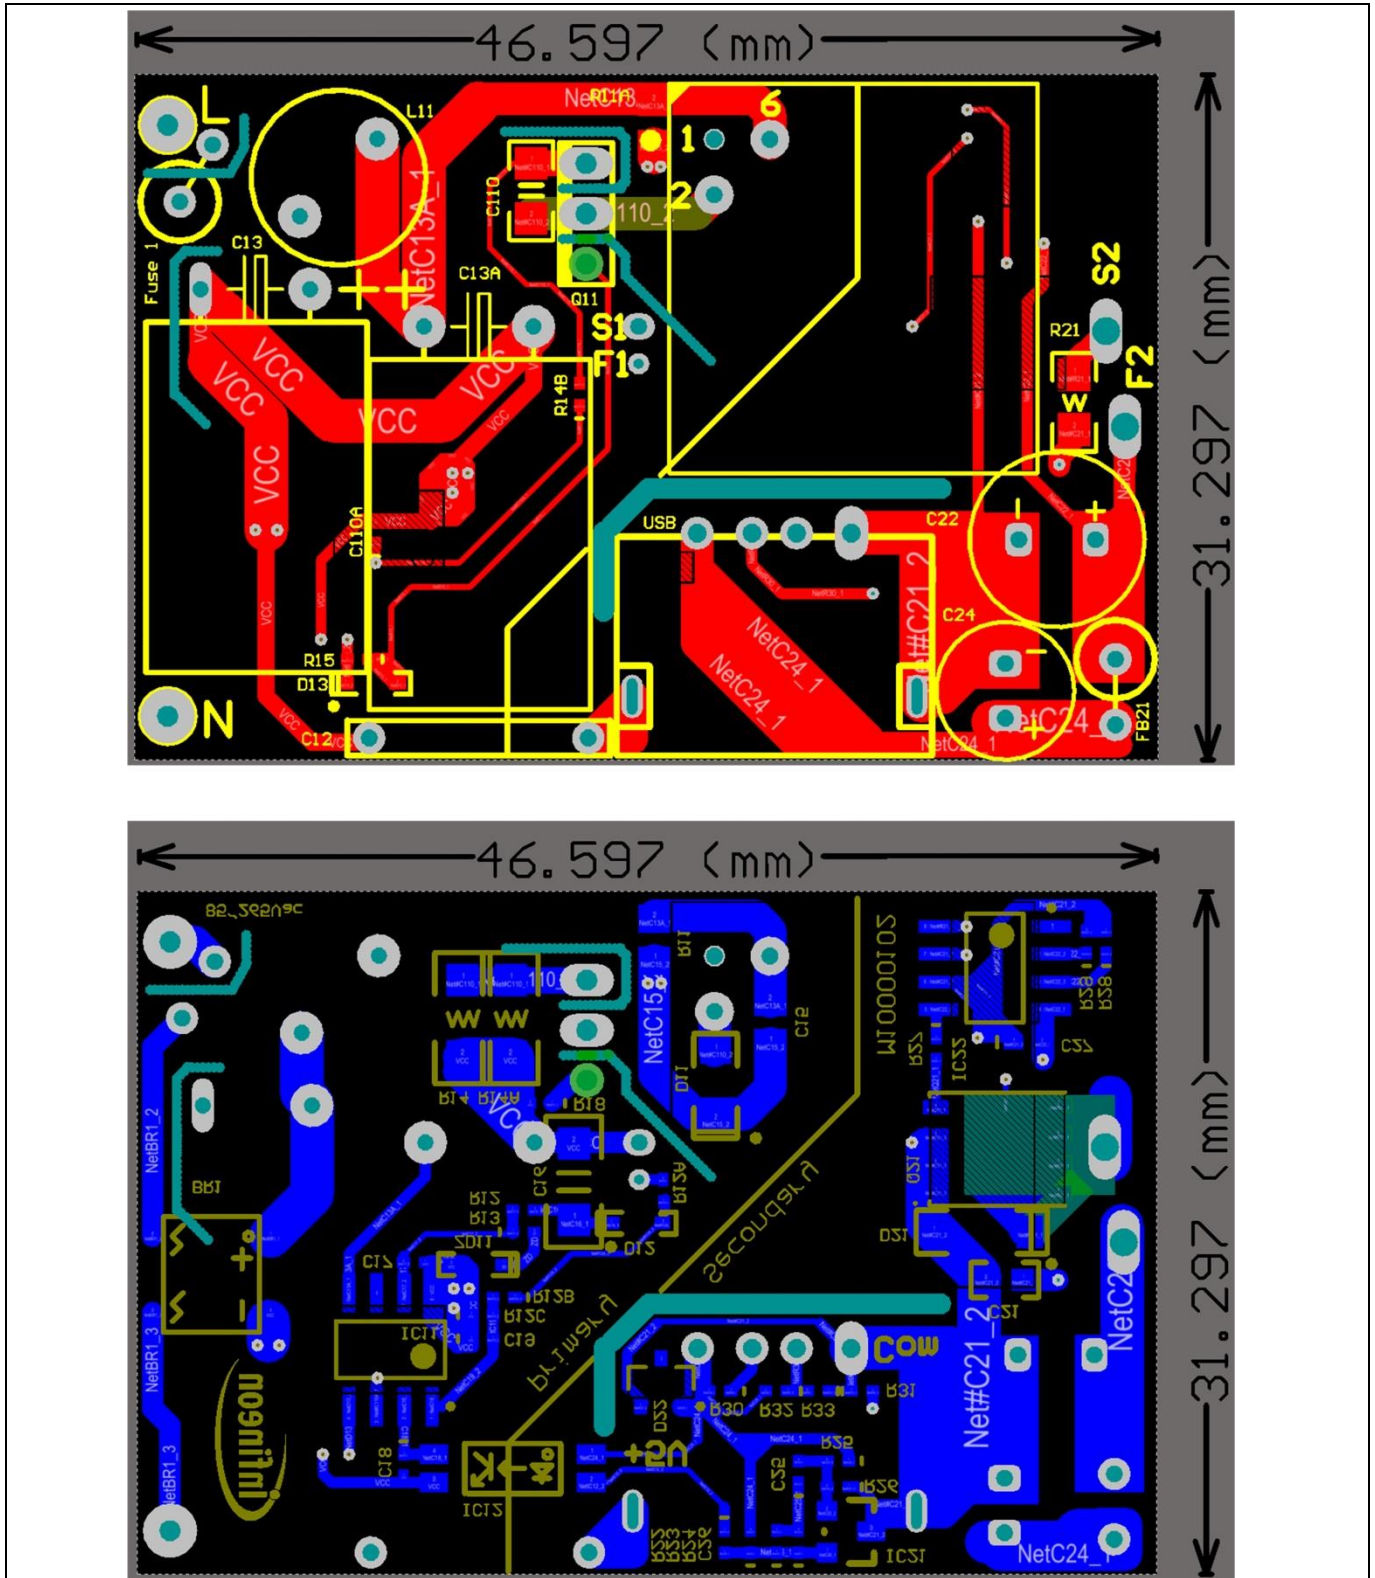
Top side copper (upper picture) and bottom side copper (lower picture)
